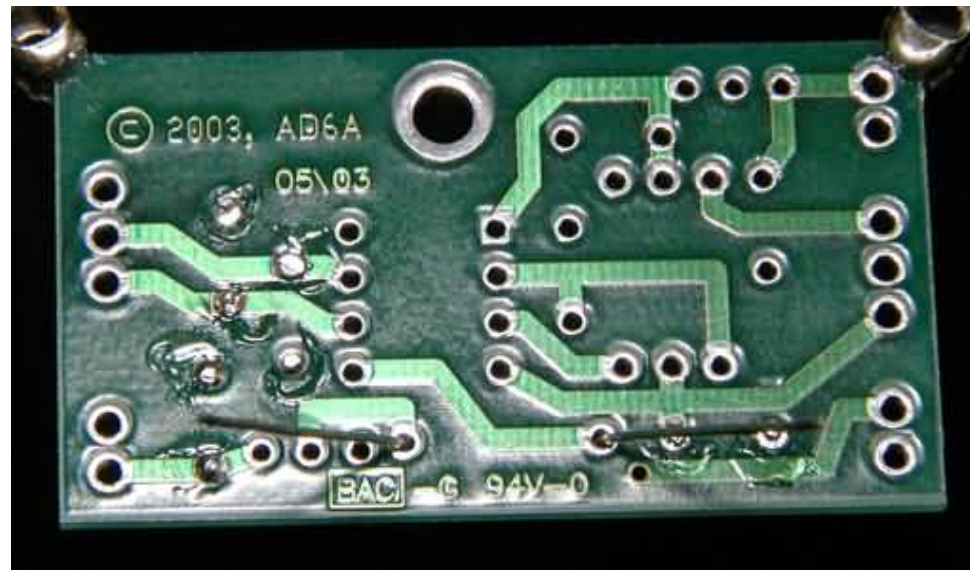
Bend leads outward to hold resistor close to surface of the PC board
